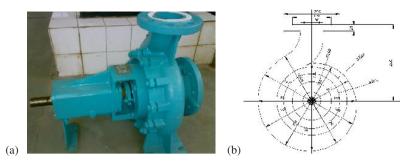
(a) Centrifugal pump (left) and (b) 2-D drawing of casing (right).
